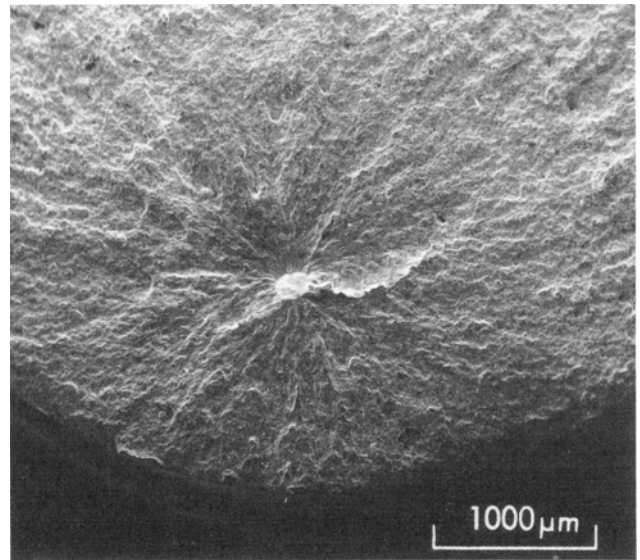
Crack initiation site at a near surface hafnium oxide inclusion on AF-115 fracture surface.
